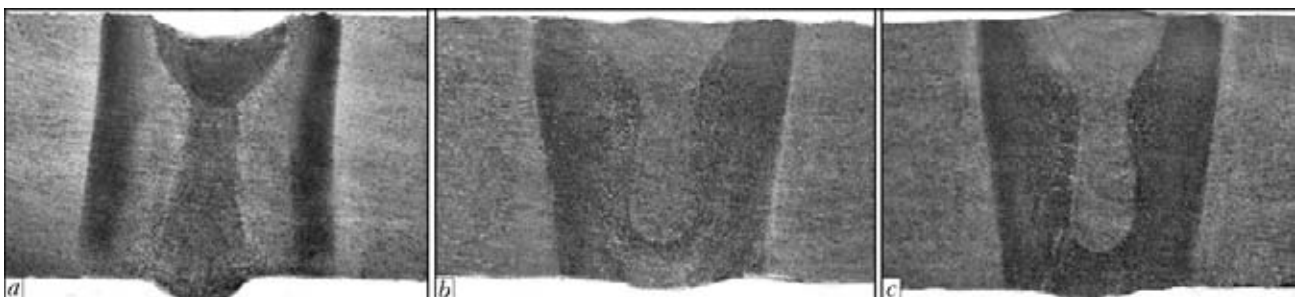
Appearance of surface of the butt joint from alloyed steel after laser welding without (a) and with (b) melting of filler wire
